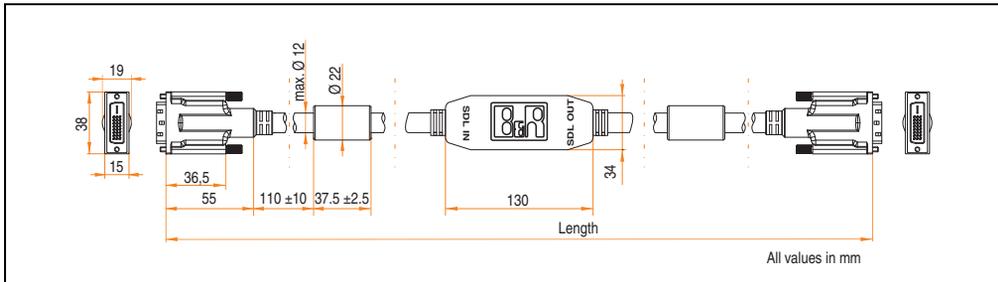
Dimensions - SDL flex cable with extender 5CASDL.0xx0-13
